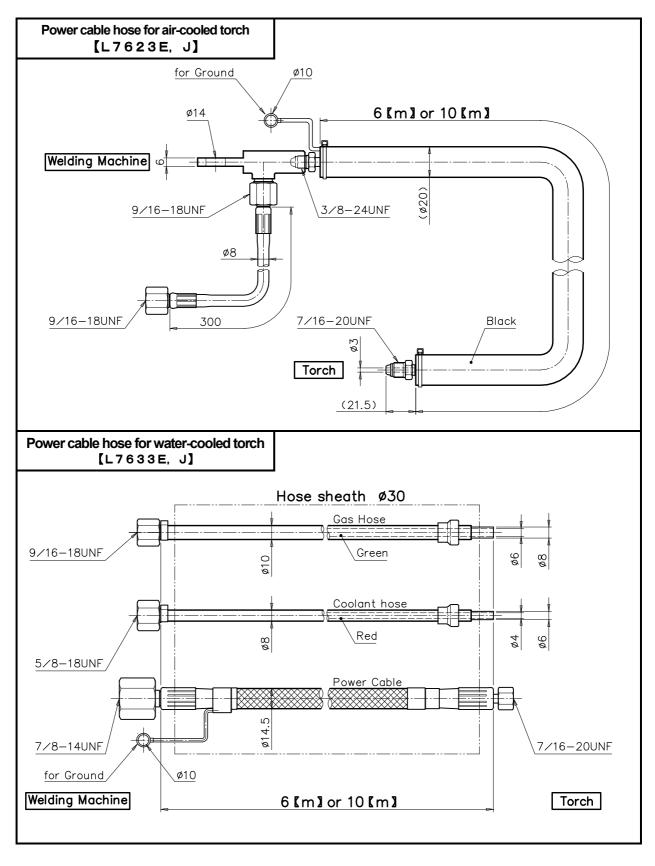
Outline Drawing of Air-Cooled/Water-Cooled Power Cable Hose Unit (mm)
